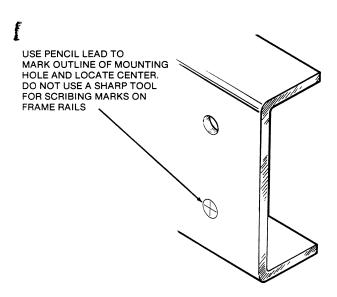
MARKING MOUNTING HOLE LOCATION
